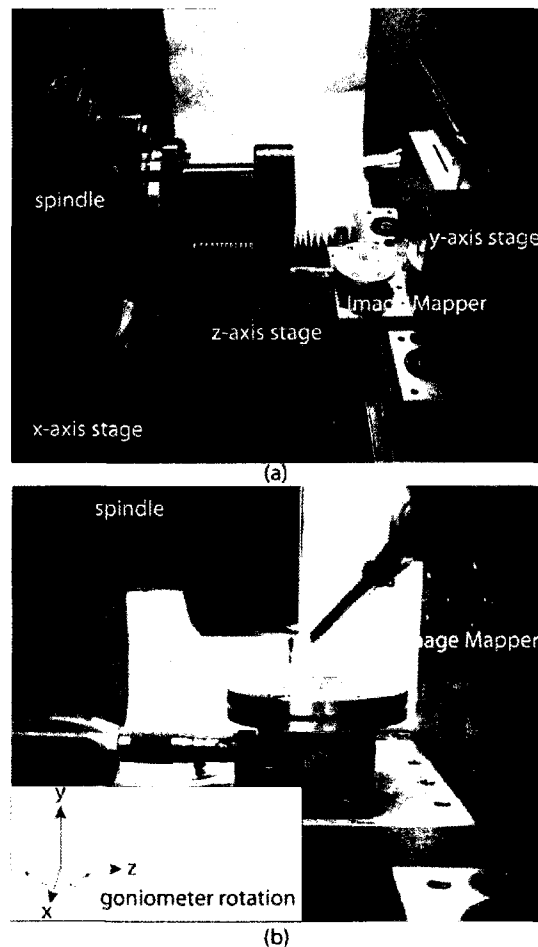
(a) Picture of Nanotech 250 UPL Machine with axis labeled. (b) Close up of goniometer fixture used to rotate the image mapper for fabrication of x-tilt mirror facets.
